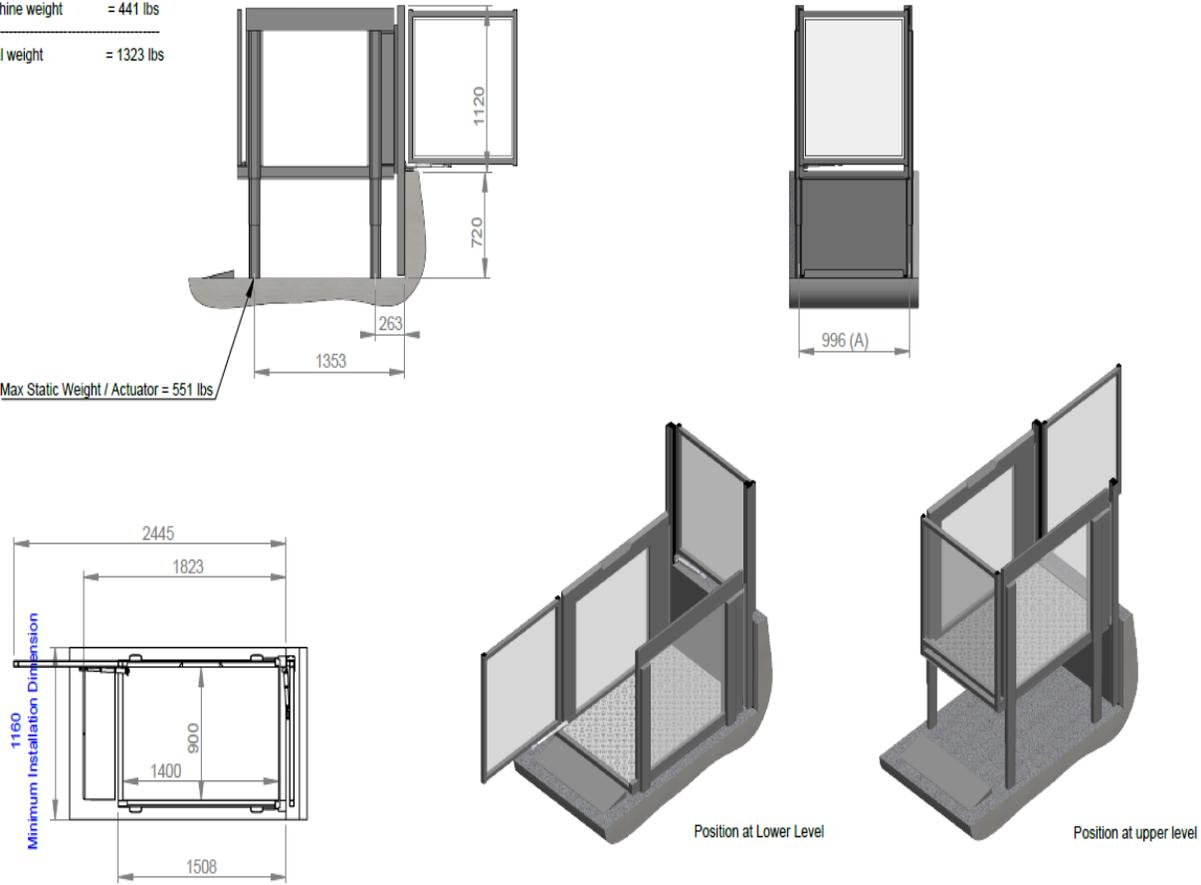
EasyLift Enclosure dimensions (minimum)
